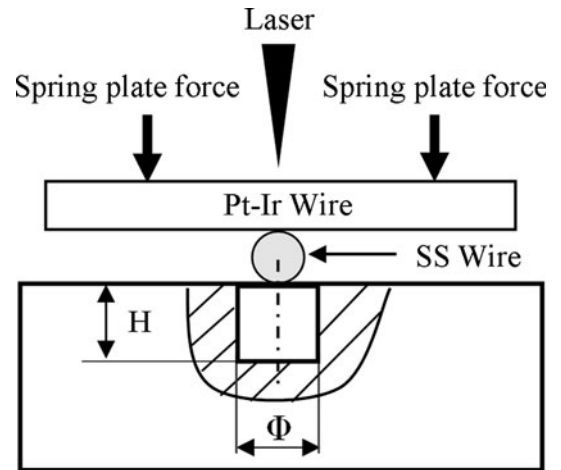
Schematic of welding fixture, where $H = 1$ mm and $\Phi = 1$ mm (not to scale).
